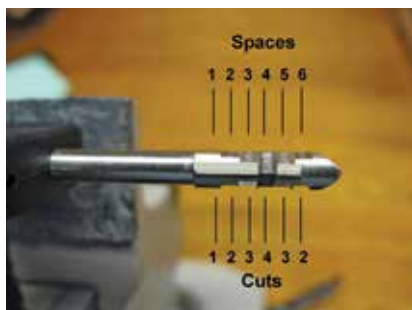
Six-wafer Tibbe key cut to: 1 2 3 4 3 2
